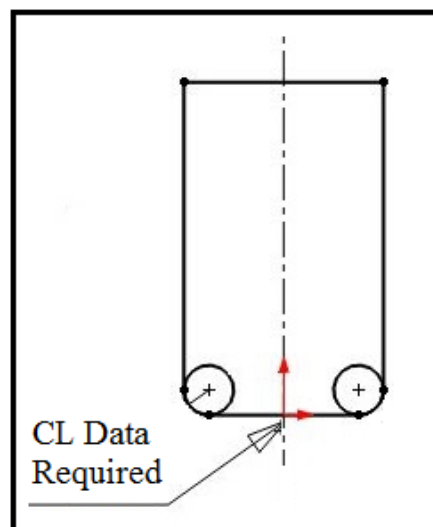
CL Data required in Excel File for 3 axis machining.
